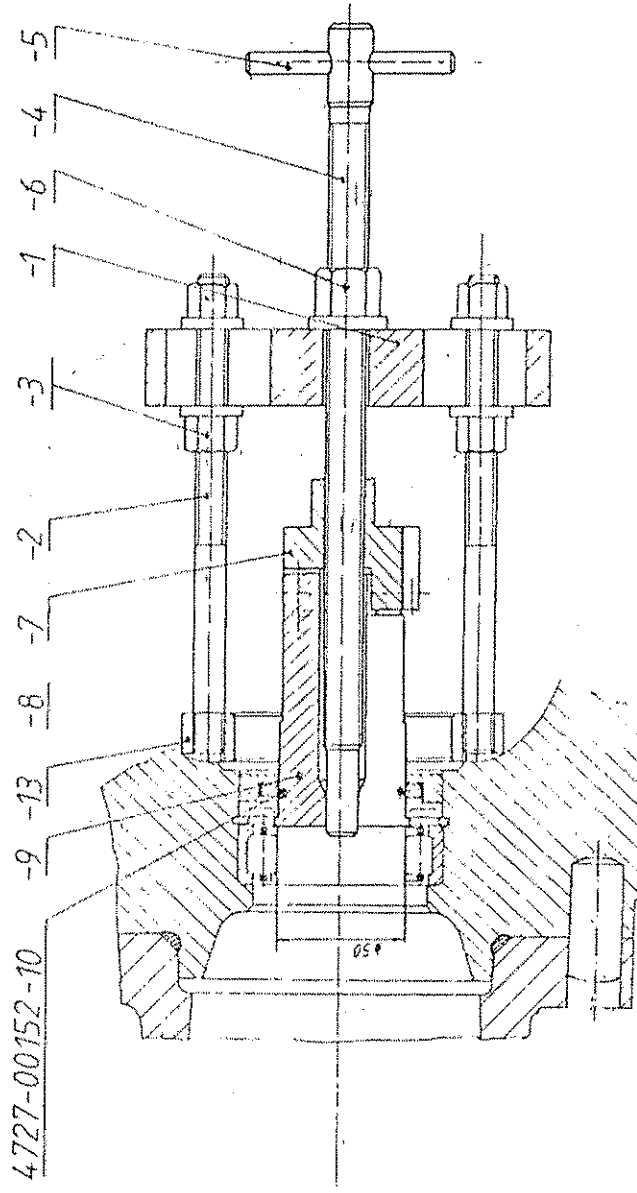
REMOVAL OF KNUCKLE SUPPORT BEARING
